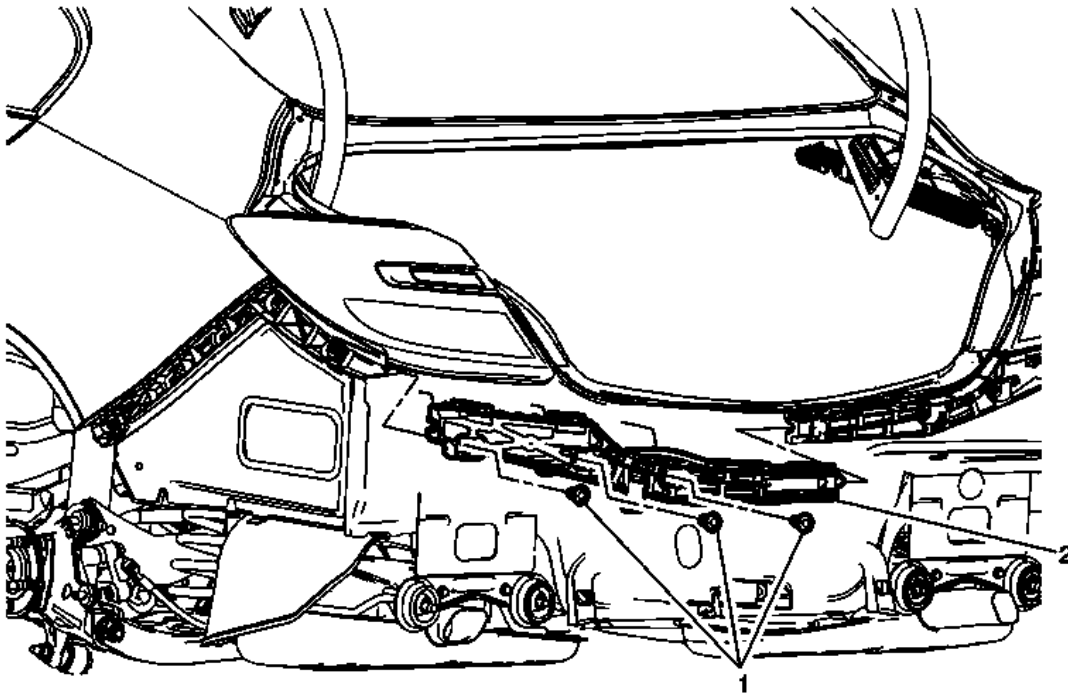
Rear Bumper Fascia Guide (Left Side)
